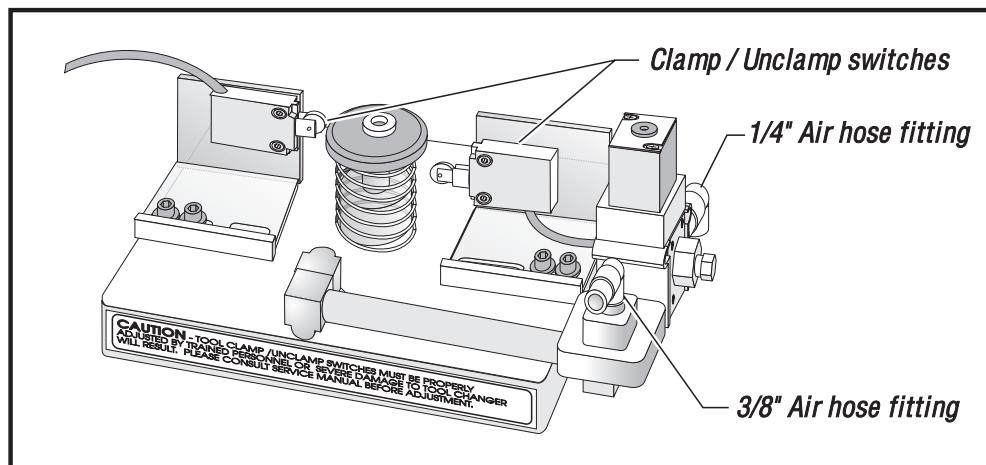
Tool release piston assembly with air solenoid assembly.
